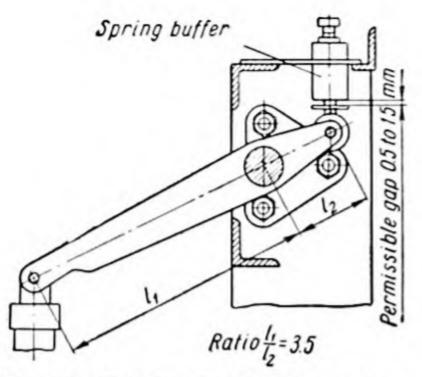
Position of middle lever when breaker is closed (lever end bears on spring-buffer bolt head)
